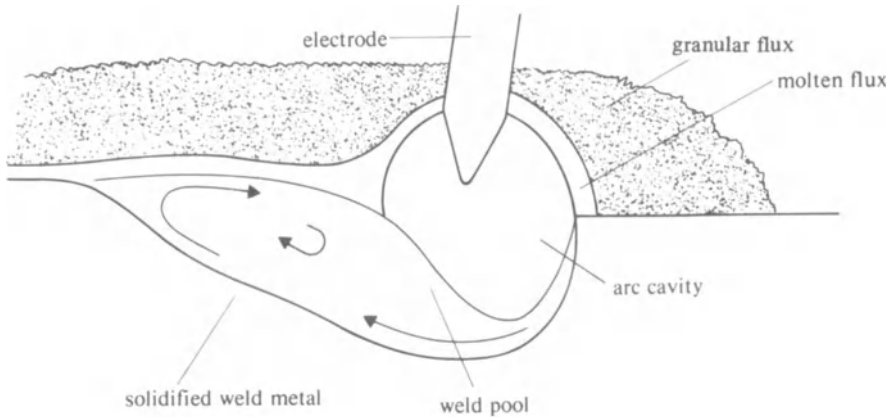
Typical form of weld pool in SA welding.
